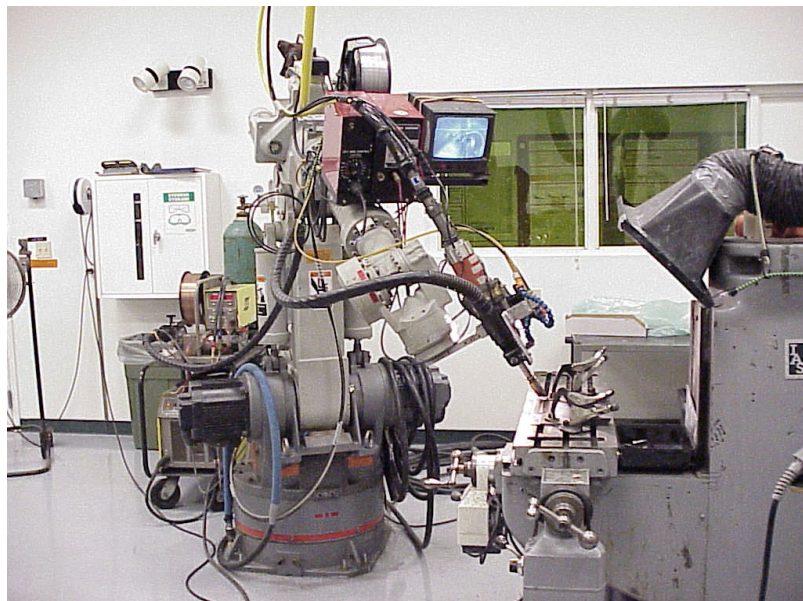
Fibre-Delivered Nd:YAG Laser and ESAB GMAW-P Equipment Setup on a Lap Joint for Single- and Dual-Spot Welding Trials
